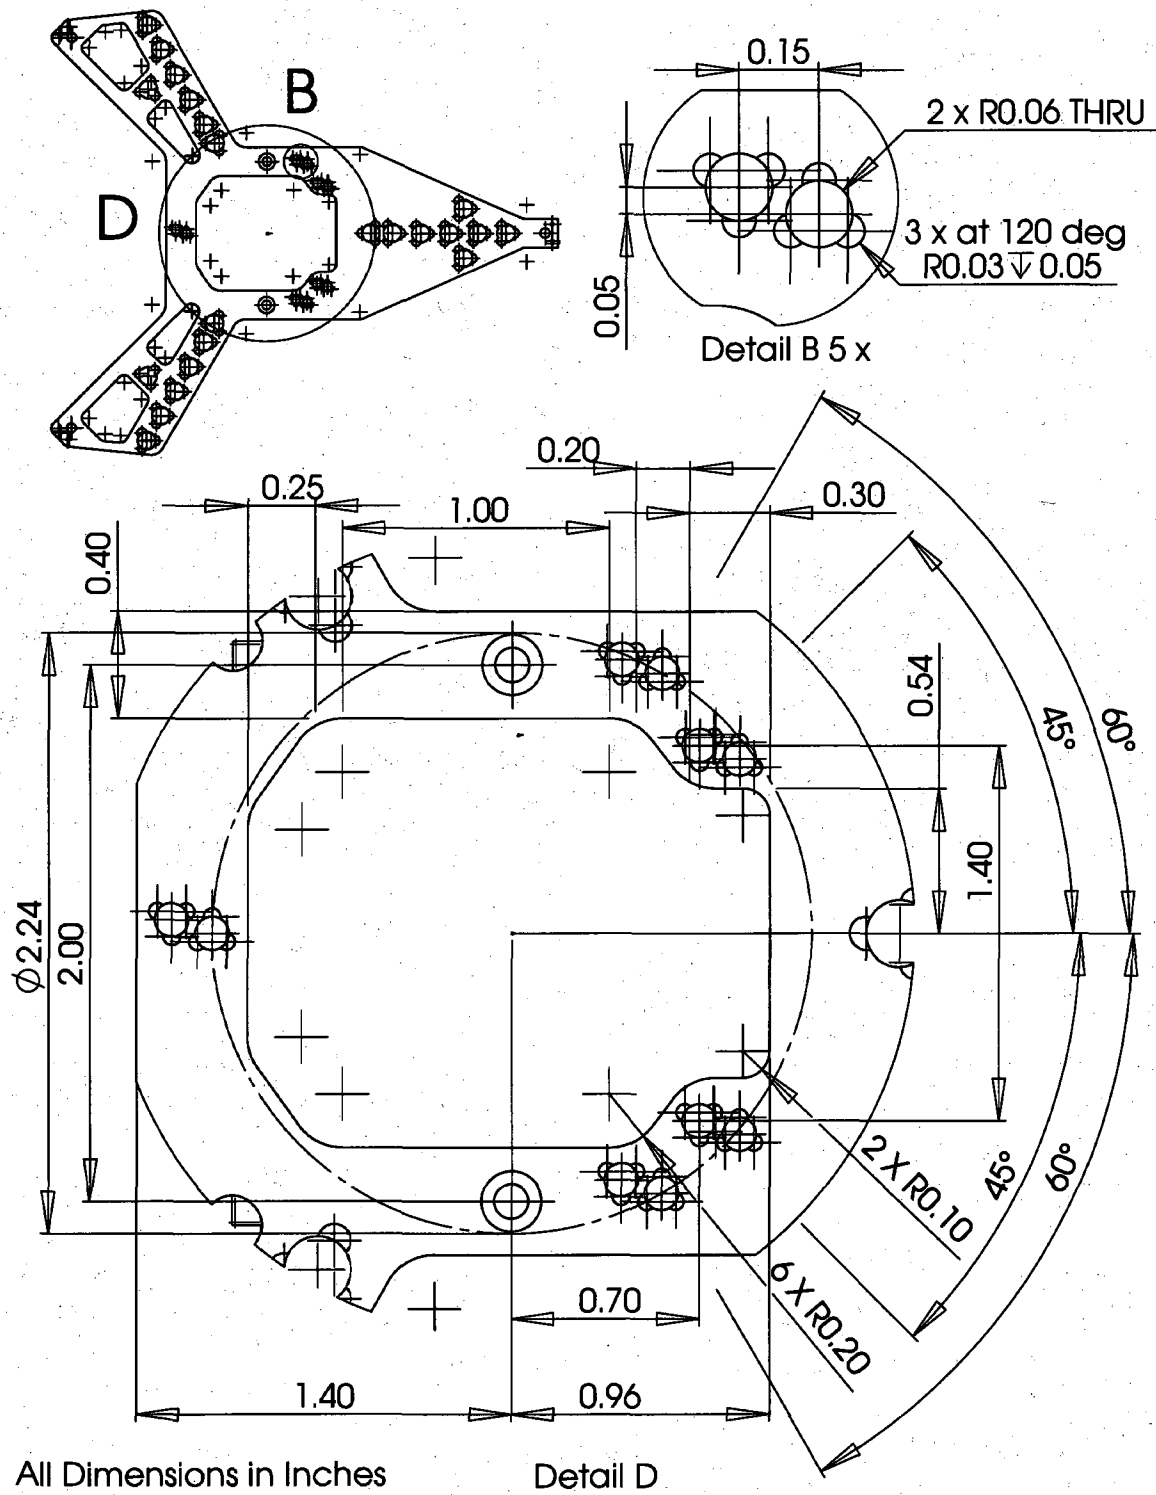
Mechanical Drawing: Pendulum platform, mounting fixture holes.
